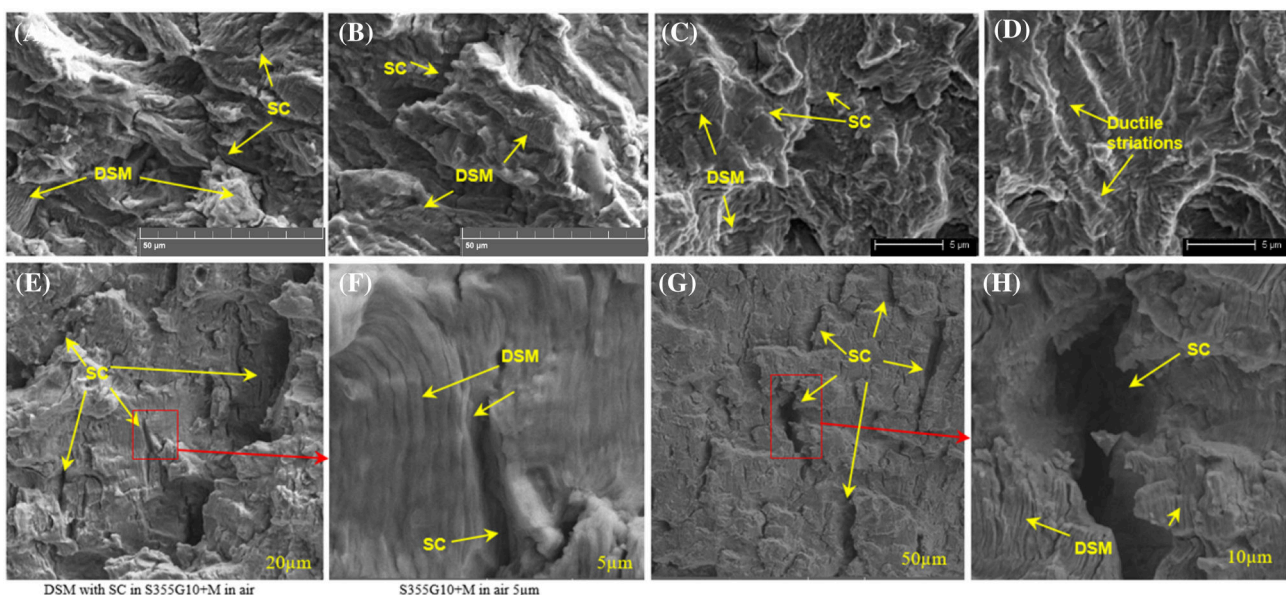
Fractographs of fatigued surfaces for (A–D) J2N and (E–H) G10 in air [ductile striation mechanism (DSM) with secondary crack (SC)] [Colour figure can be viewed at wileyonlinelibrary.com]
